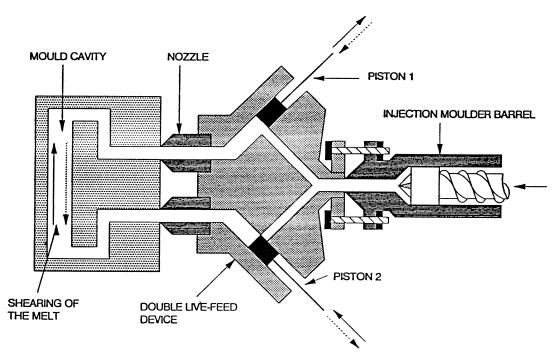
The valve arrangement used to induce reciprocating flow after mould filling.
